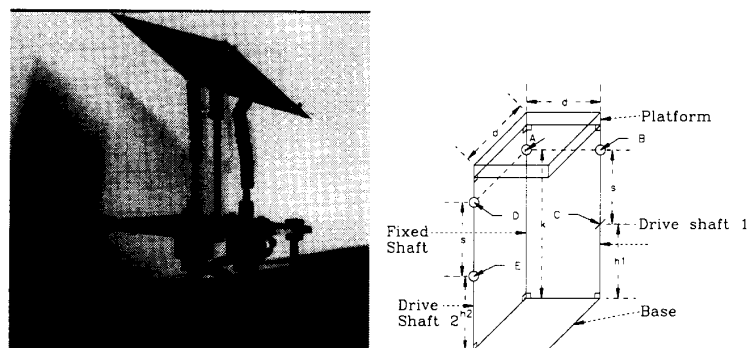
The platform pantilt. Photo (left). This stepper motor-based actuator is capable of positioning a load of 80 grams; for example a small video camera. Illustration (right). The three dimensional mechanism we use. Note that circles at points *A*, *B*, *D* and *E* denote universal joints with two degrees of freedom while the line at point *C* denotes a pin joint with only one degree of freedom.
